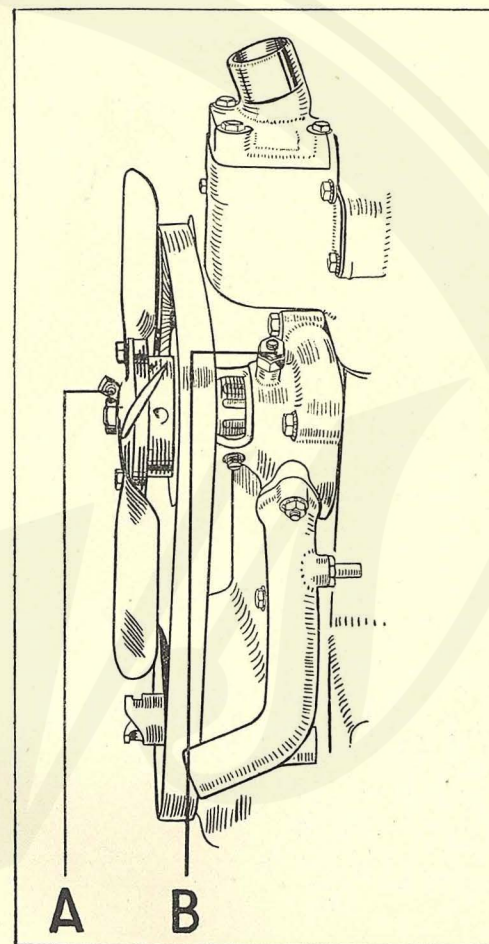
Water pump, fan and greasers. A, fan bearing greaser; B, water pump spindle bearing greaser.
